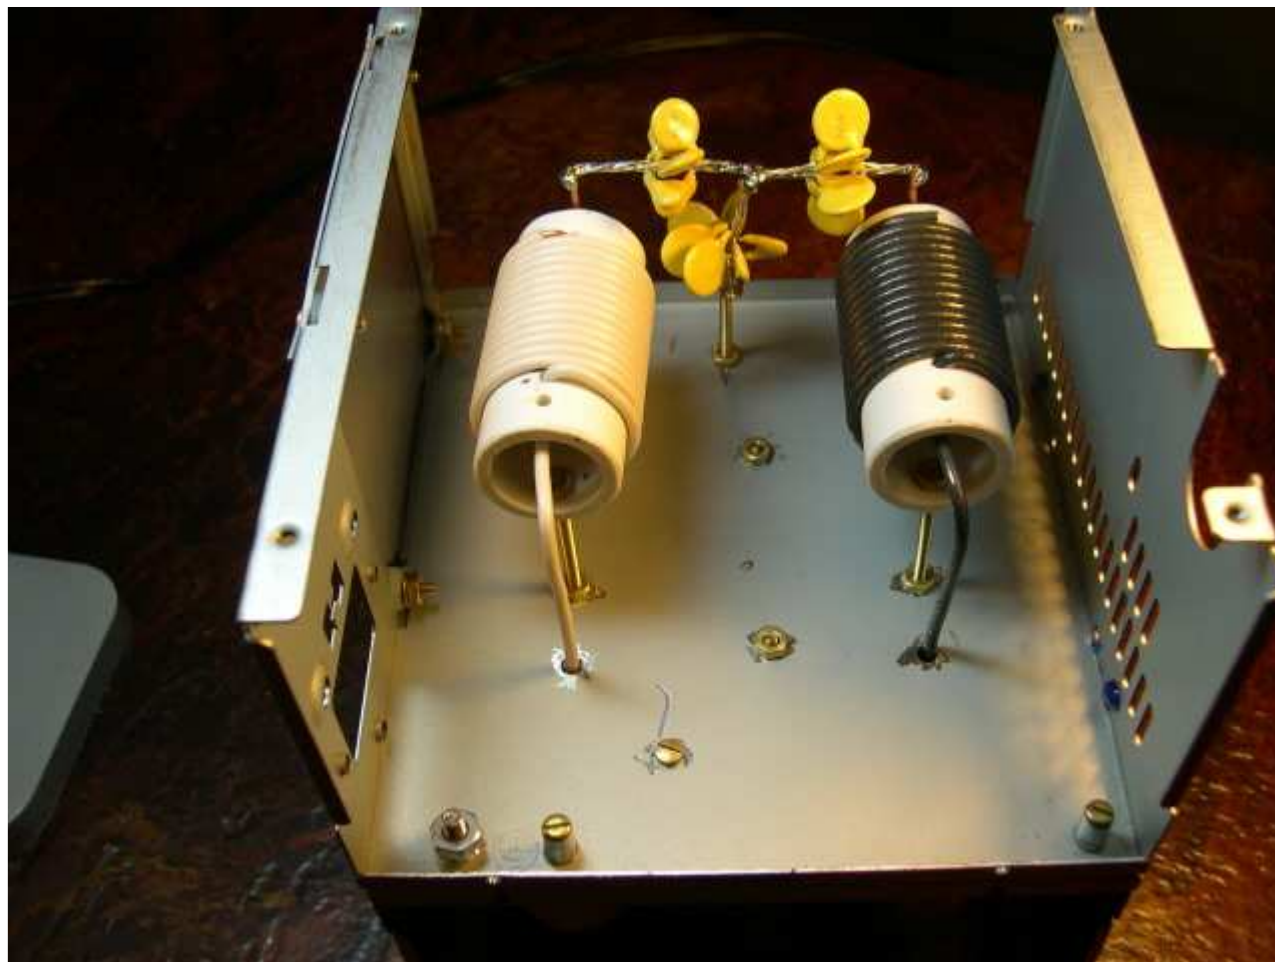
Bottom view showing coil feed-through holes and capacitor detail. [[high resolution version](#)]
